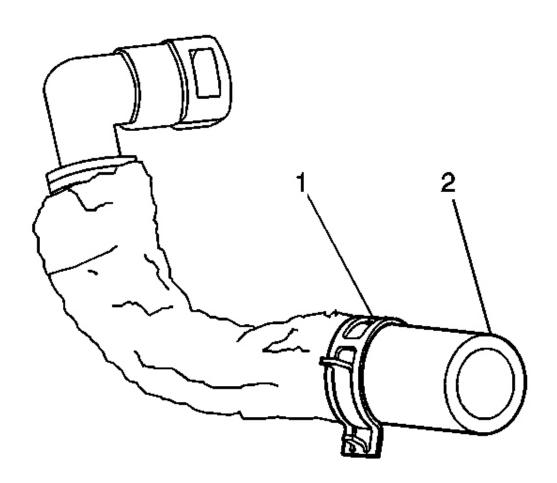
View Of Inlet Heater Hose (Short Wheel Base)
